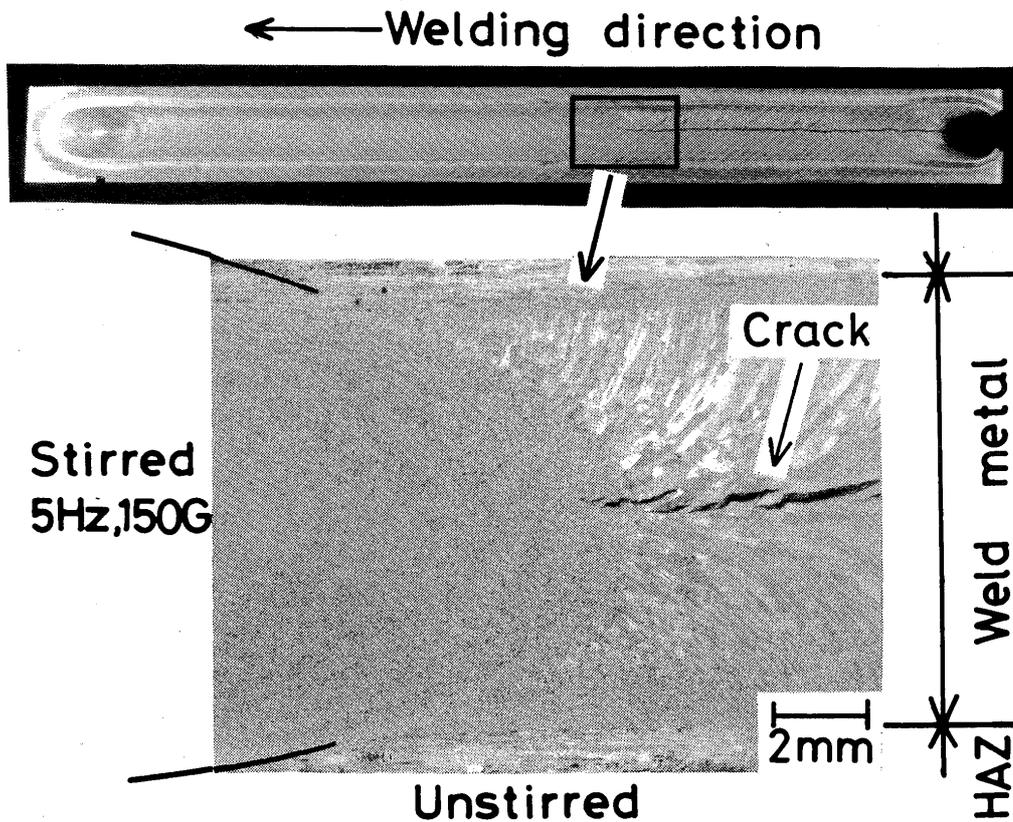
General appearance of weld-bead surface showing macrostructural change caused by electromagnetic stirring applied on the way of welding: 70A, 300 mm/min; 5 Hz, 150 gauss
